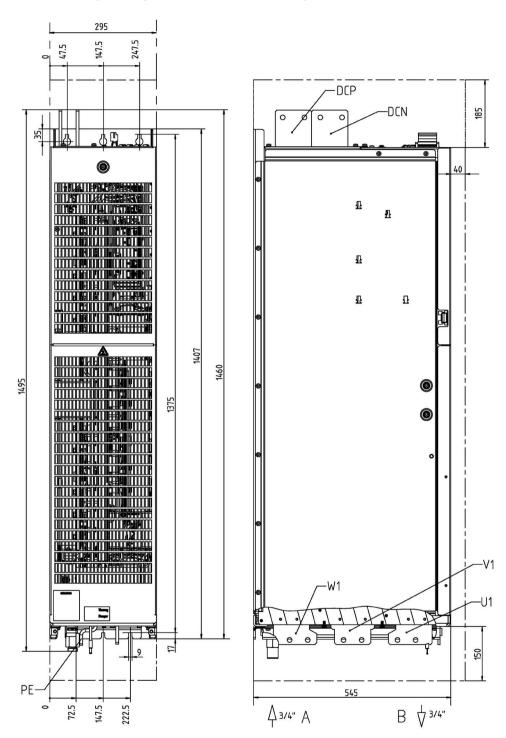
Dimension drawing Active Line Module, frame size JXL, article numbers 6SL3335-7TE41-0AA3, 6SL3335-7TE41-4AA3, 6SL3335-7TG41-0AA3, 6SL3335-7TG41-3AA3. Front view, side view
